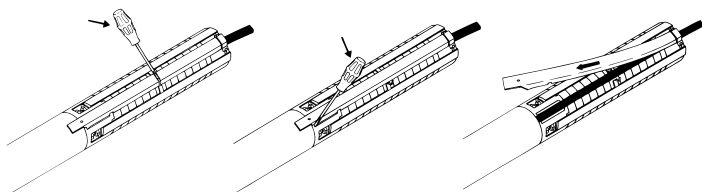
Removal and fitting of cable guard for SP 385S, 475S, 625S, 800S, and 1100S
